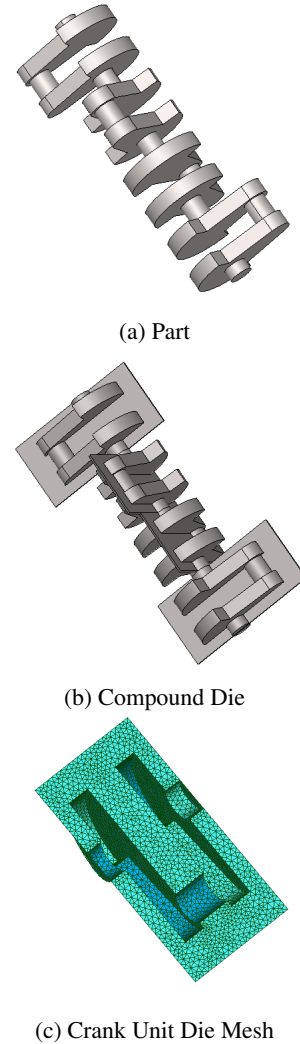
crossplane crankshaft part: a: part, b: die, c: die mesh
